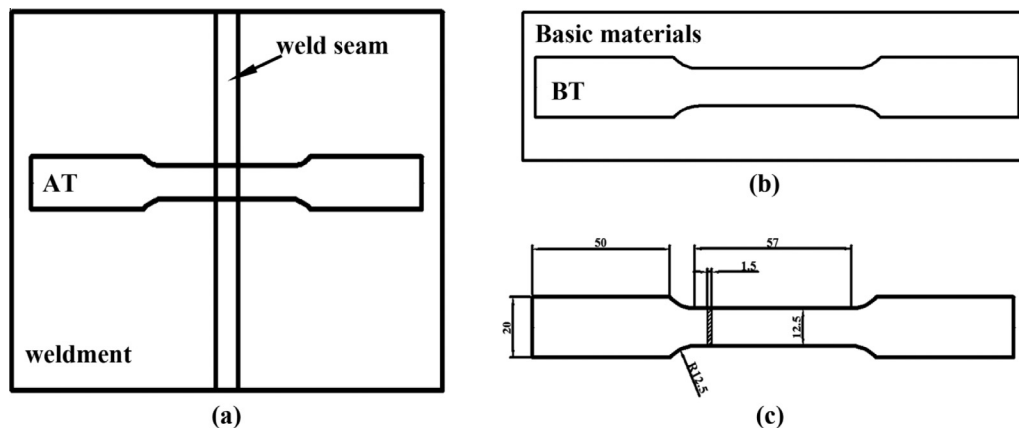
Schematic drawing of tensile test specimens: (a) positions of AT tensile specimens in the weldments; (b) positions of BT tensile specimens in the basic materials and (c) dimension of tensile specimens in mm.
